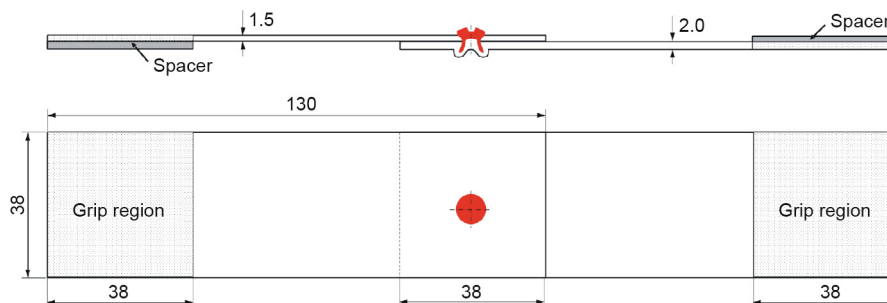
Dimensions of lap-shear and fatigue testing samples. The unit is millimeter.
